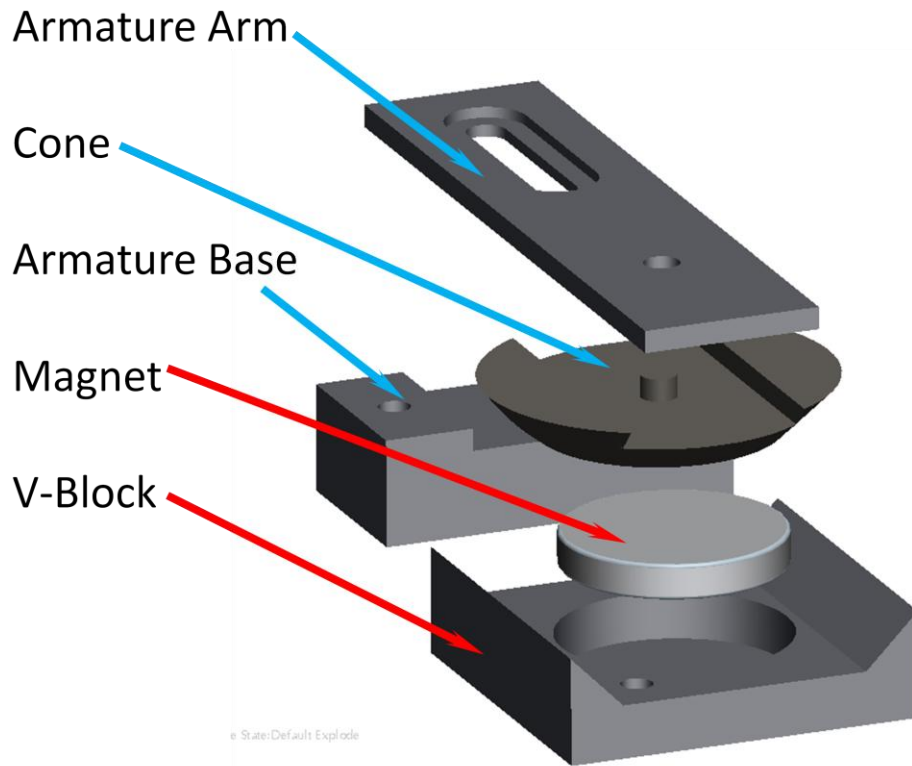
The female (red) assembly and the male (blue) assembly as the IM subsystem.
